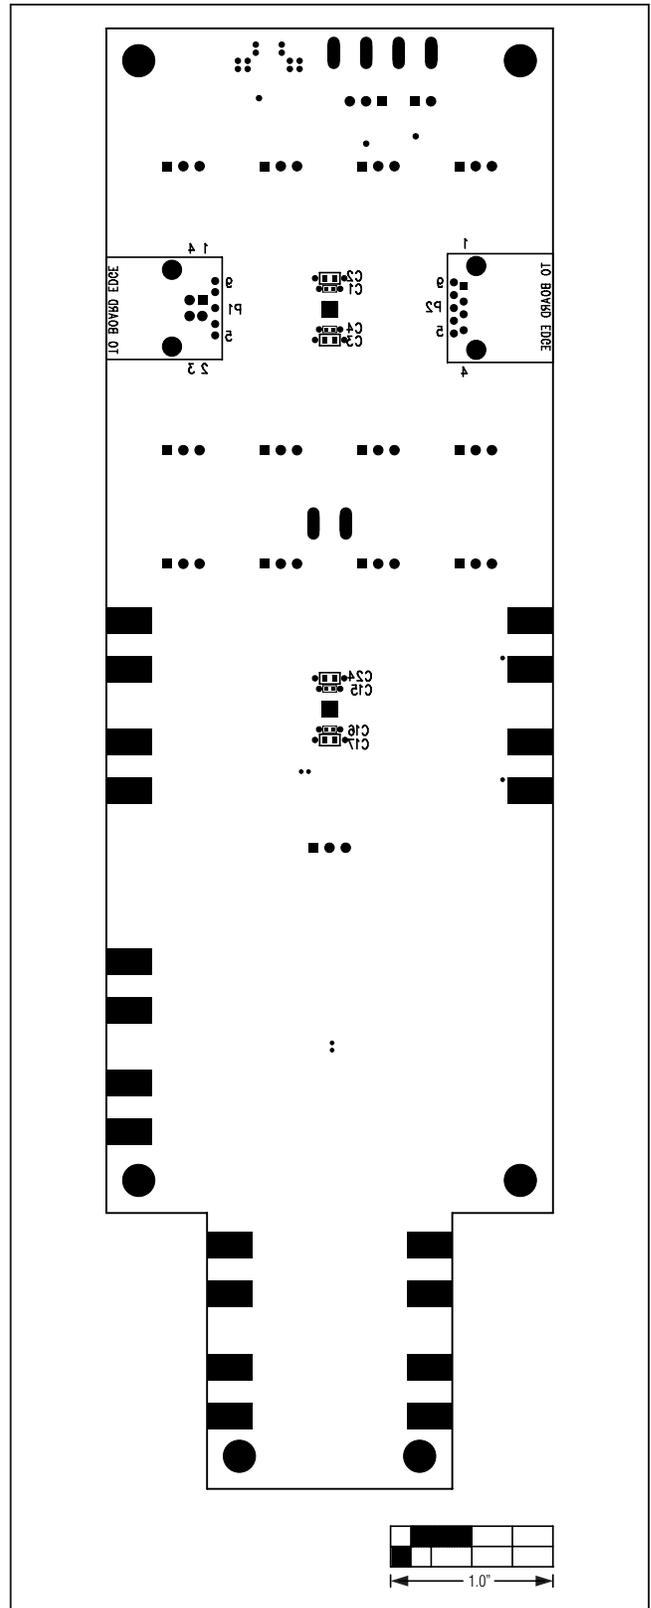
MAX14972 EV Kit Component Placement Guide—Solder Side
